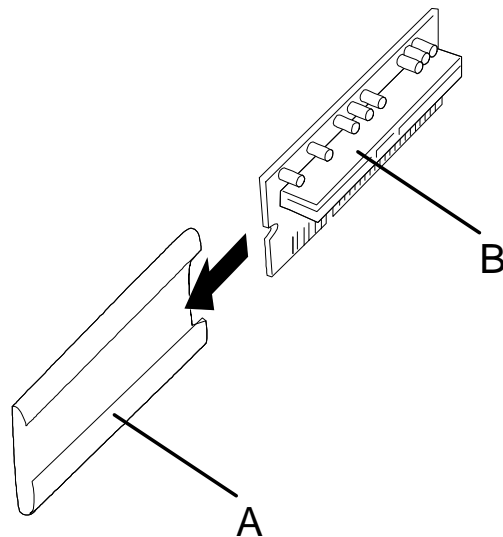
Attaching the PCI Bracket to the Option Board
